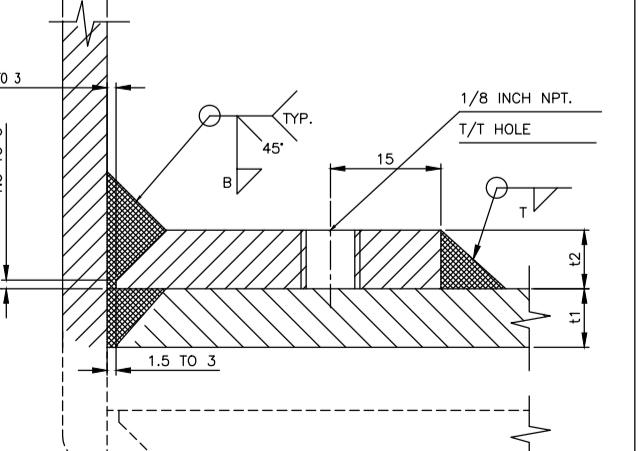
' SHELL TO SHELL WELD DETAIL
